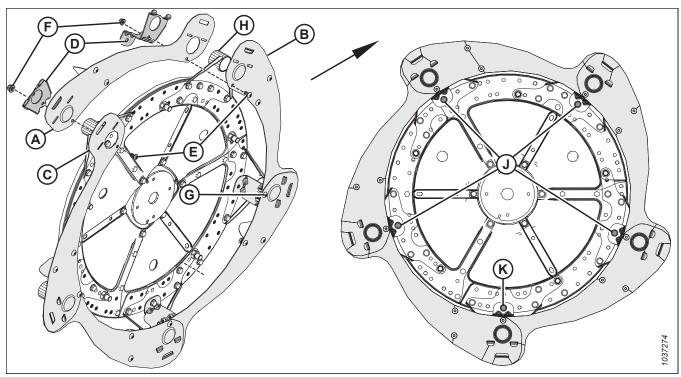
Five-Bat Reel - Assembled Reel Endshields on Reel
